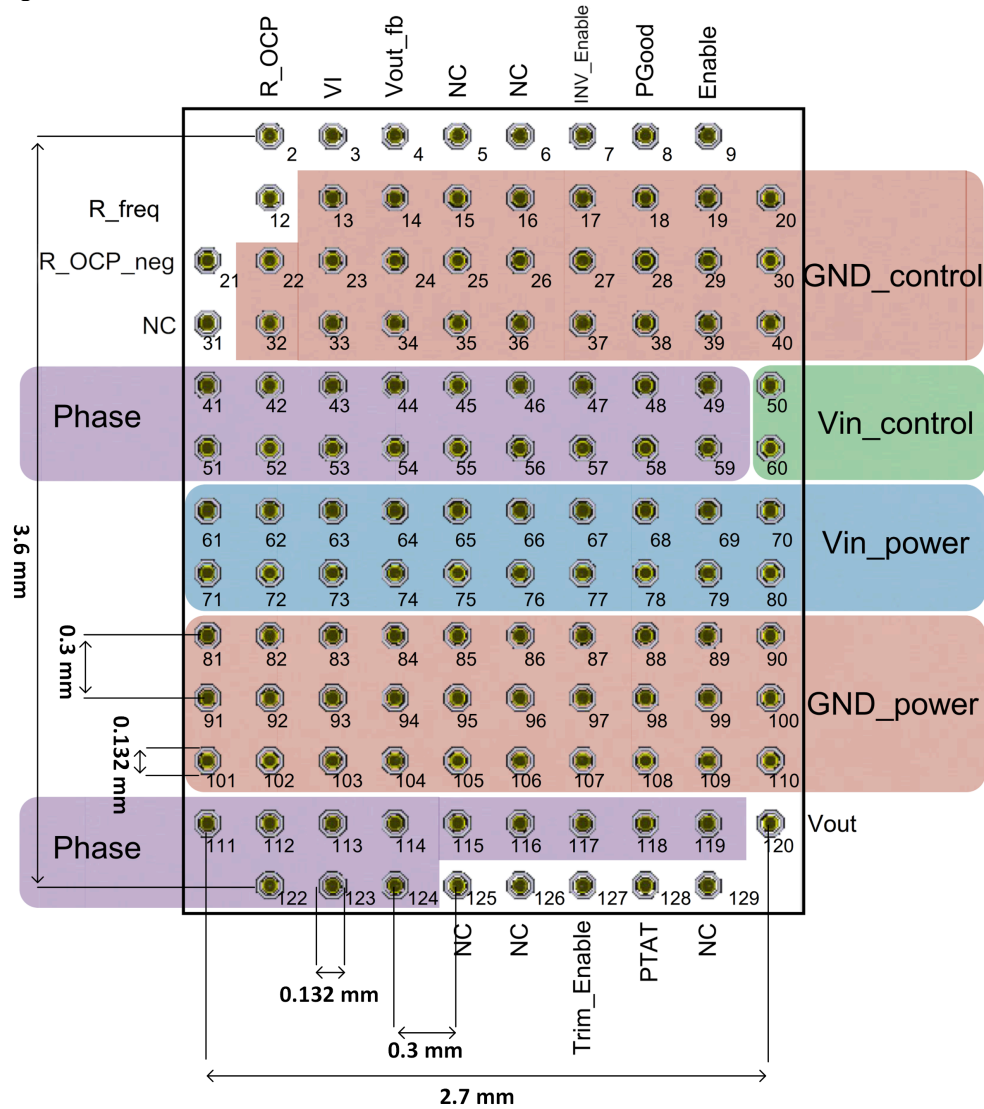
bPOL2V5_V3.3 pin layout (recommended land pattern on the PCB).
